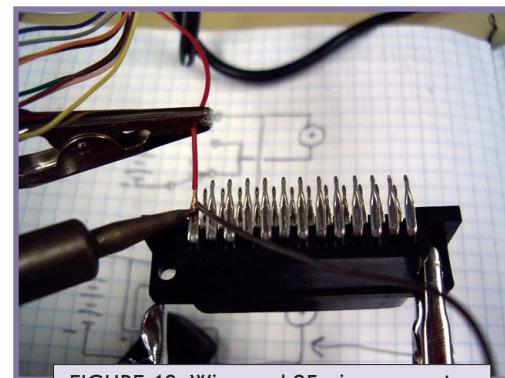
Wire and 25-pin connector being held by the Helping Hands tool while the solder and soldering iron is being held by the author.
